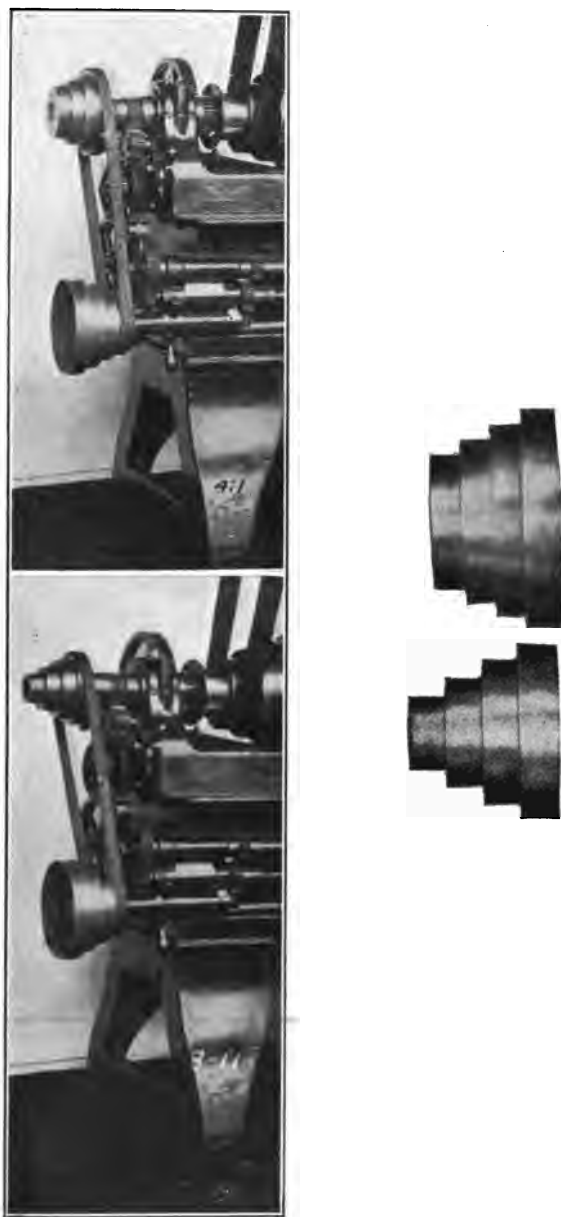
VIEW OF BOLT LATHE SHOWING THE INCREASED SIZE OF FEED CONE PULLEY AFTER HIGH-SPEED TOOLS WERE ADOPTED.
